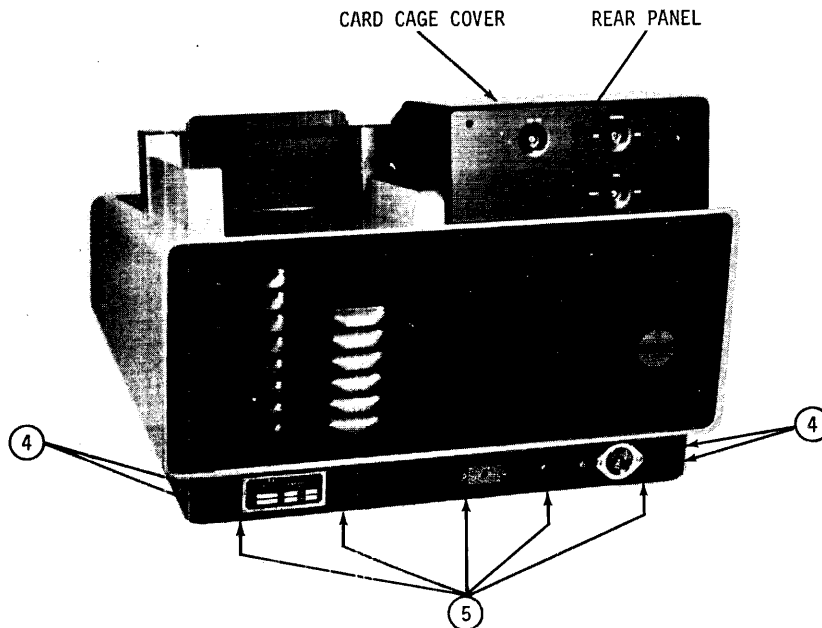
Removal of Rear Subframe Panel, Main Card Cage Cover and Panel
